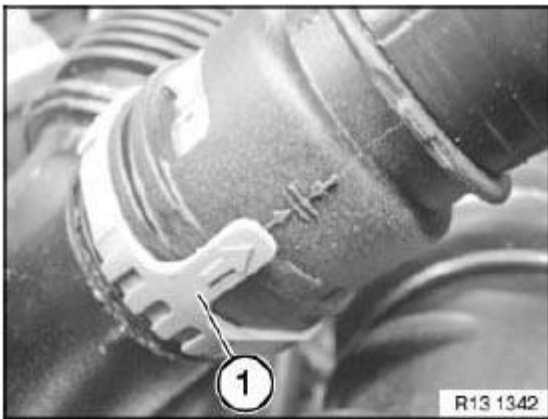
Bring Lock (1) Back 90° Into Installation Position
